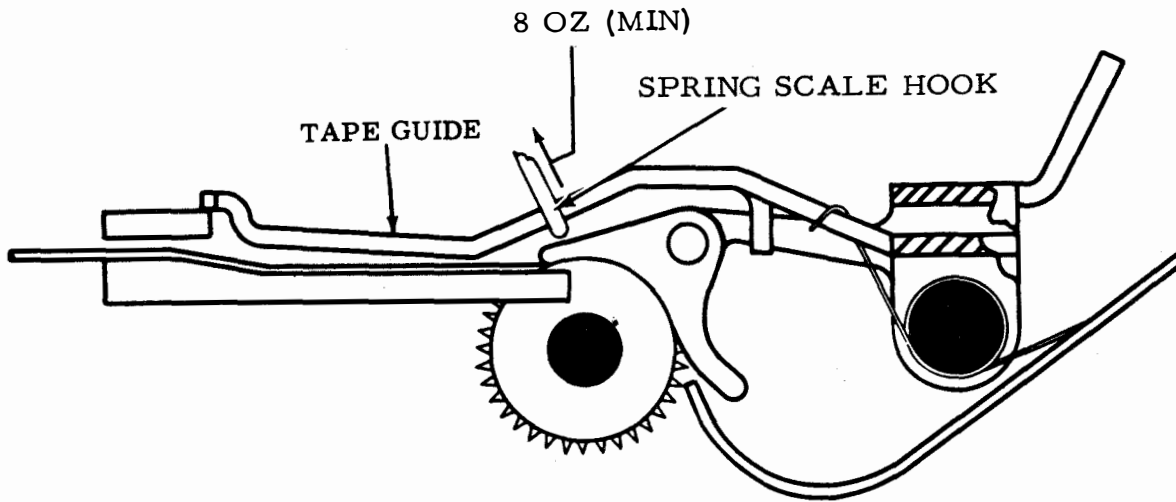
Tape Guide Spring (On Units Not Equipped with Tape Guide Adjusting Plate)
